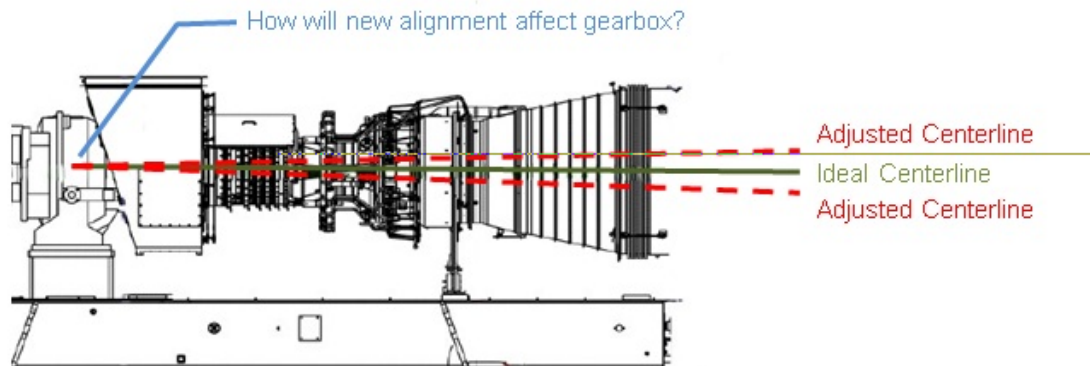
This illustrates how the shaft can be positioned in order to line up the exhaust with the customers pre-installed exhaust outlet. Notice how this alignment will affect the connection between the gearbox and engine.
